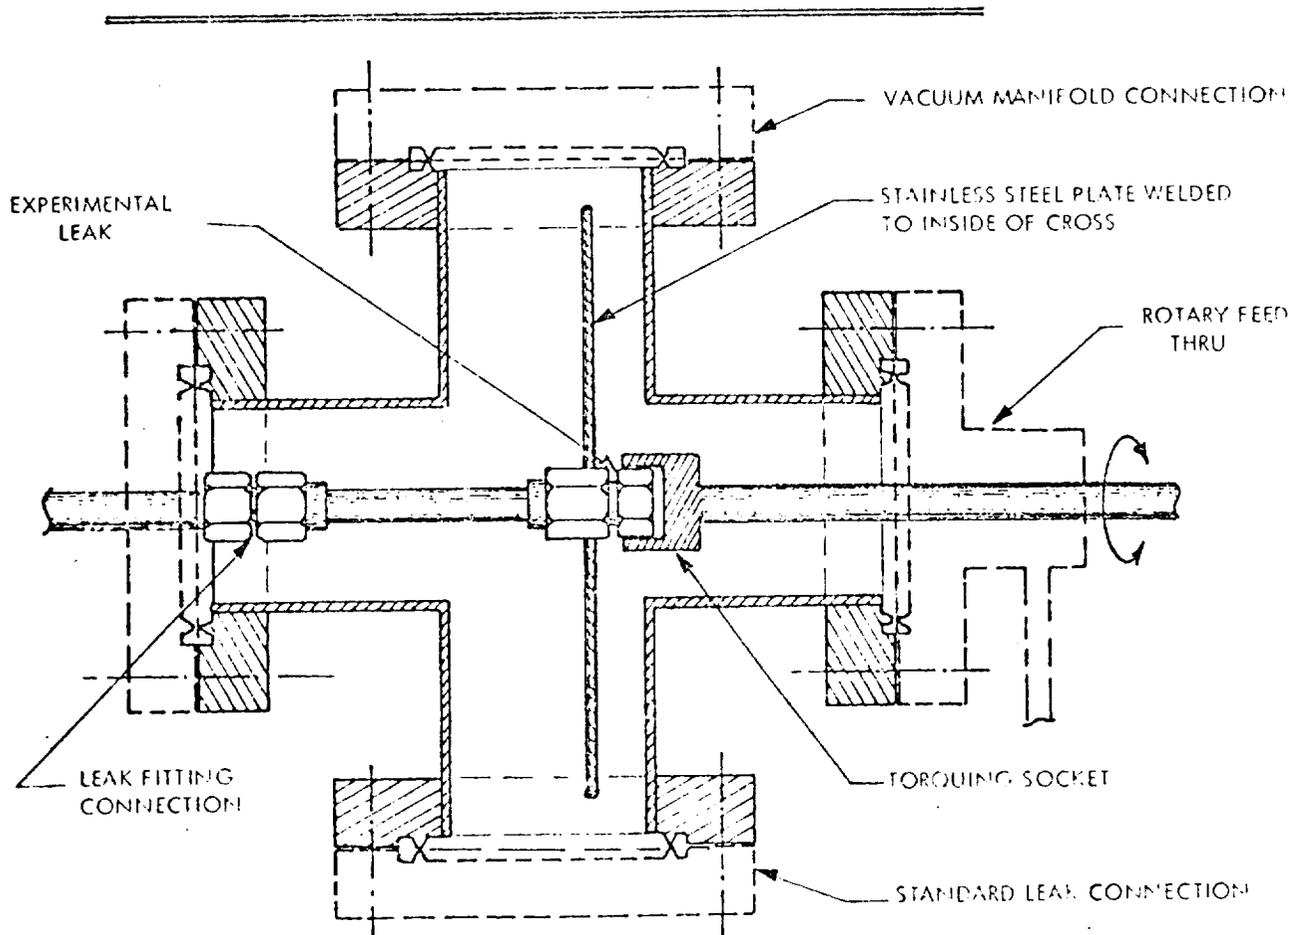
DETAIL OF TORQUING TOOL FOR ADJUSTING HELIUM LEAKS WITHIN VACUUM PLENUM
